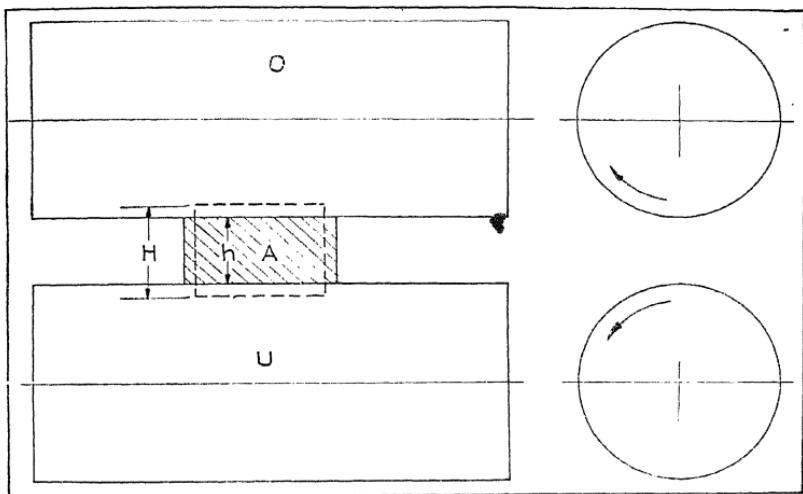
Cylindrical Roll Surfaces Showing Direct Draft
